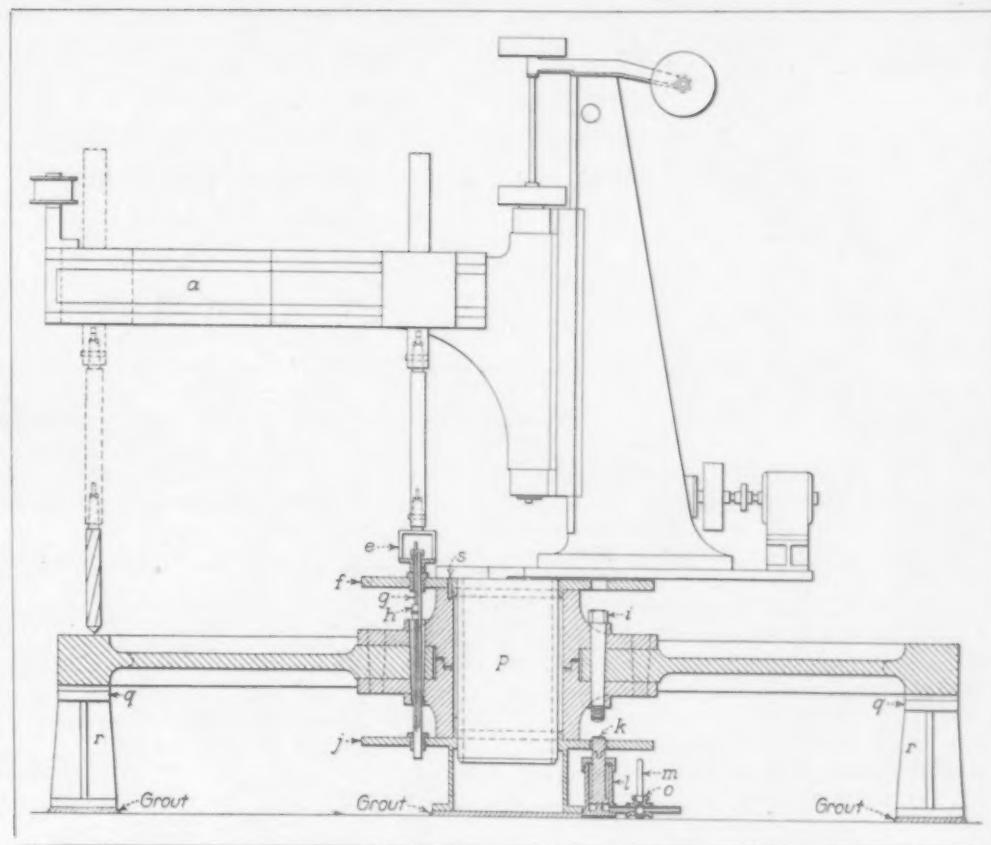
The Special Arrangement of a Radial Drilling Machine for Boring the Bolt Holes in the Segments
